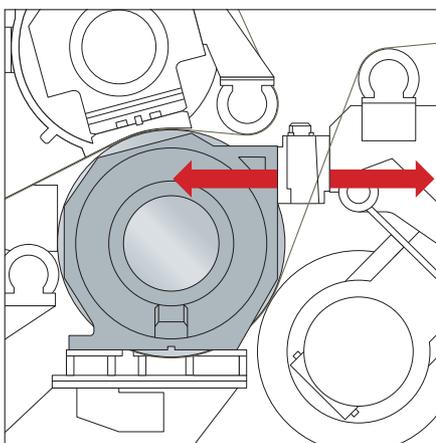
Bearing housing as part of the machine frame. If the thickness of the intermediate piece thickness is too high, it will generate loads that will deform the bearing housing.
